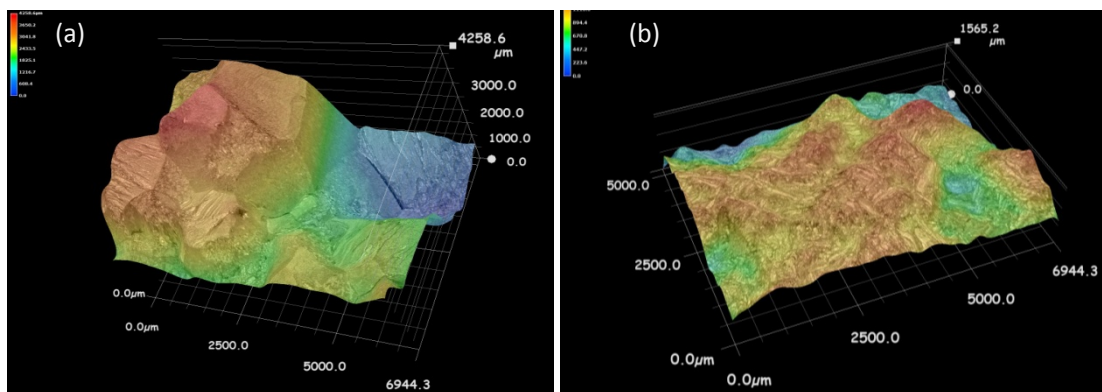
3D fracture surface of Ti64 fracture toughness samples: (a) as-cast, (b) post-HIPped.
